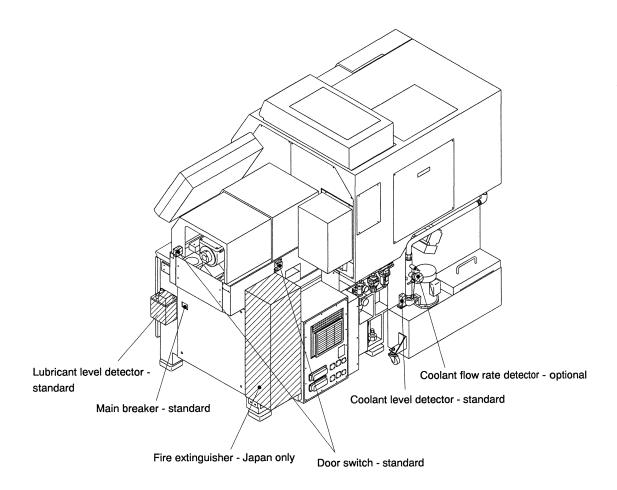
Locations on which safety devices are installed (viewed from rear of machine)
